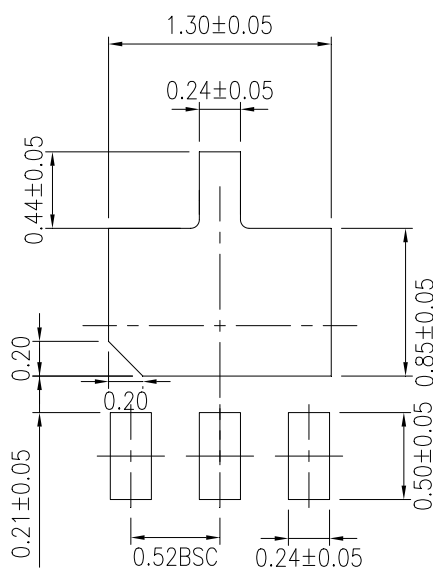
Footprint of the sensor chips with DFN1616H055-4L package (unit: mm).
